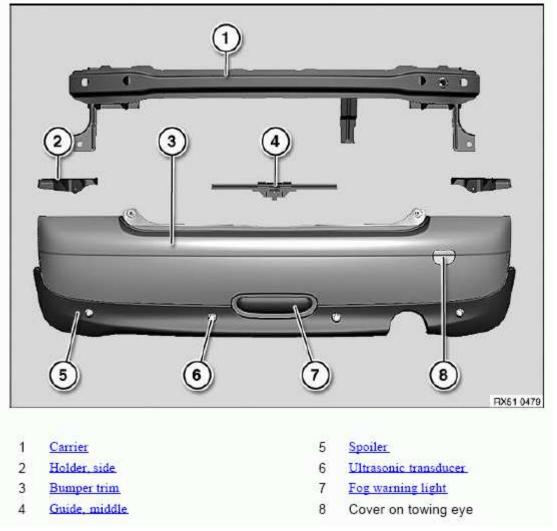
Identifying Rear Bumper Components Courtesy of BMW OF NORTH AMERICA, INC.
